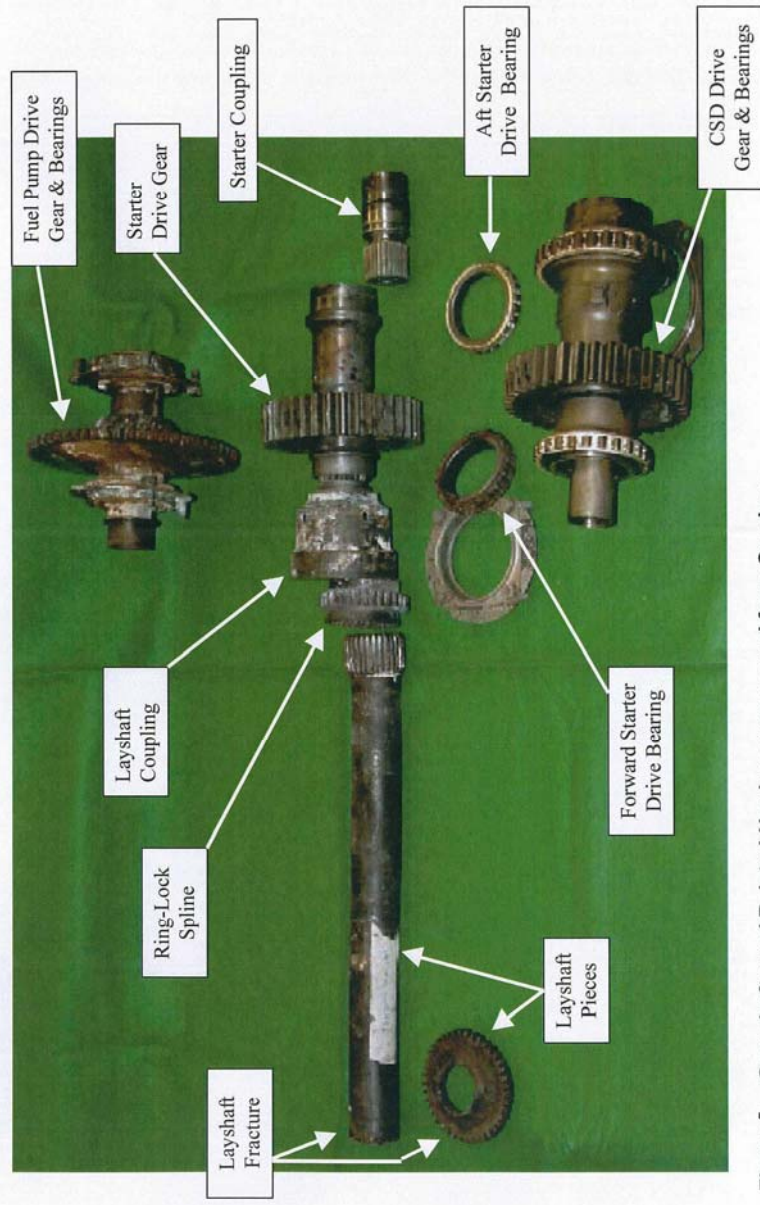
Gears shafts and Related Hardware recovered from Gearbox
